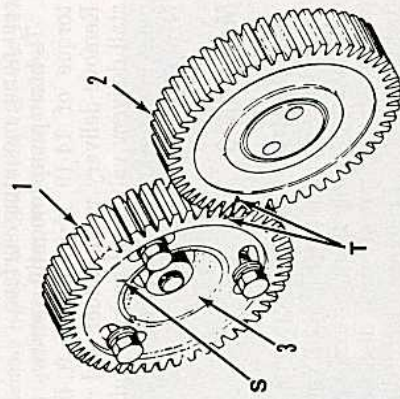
Align timing marks (S and T) on pump drive gear (1), idler gear (2) and drive coupling (3) when installing injection pump on 1500, 1700, 1710, 1900, 1910 and 2110 models.
